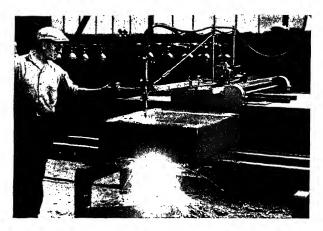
Oxy-acetylene shape cutting has revolutionized the production of parts for heavy machinery.
